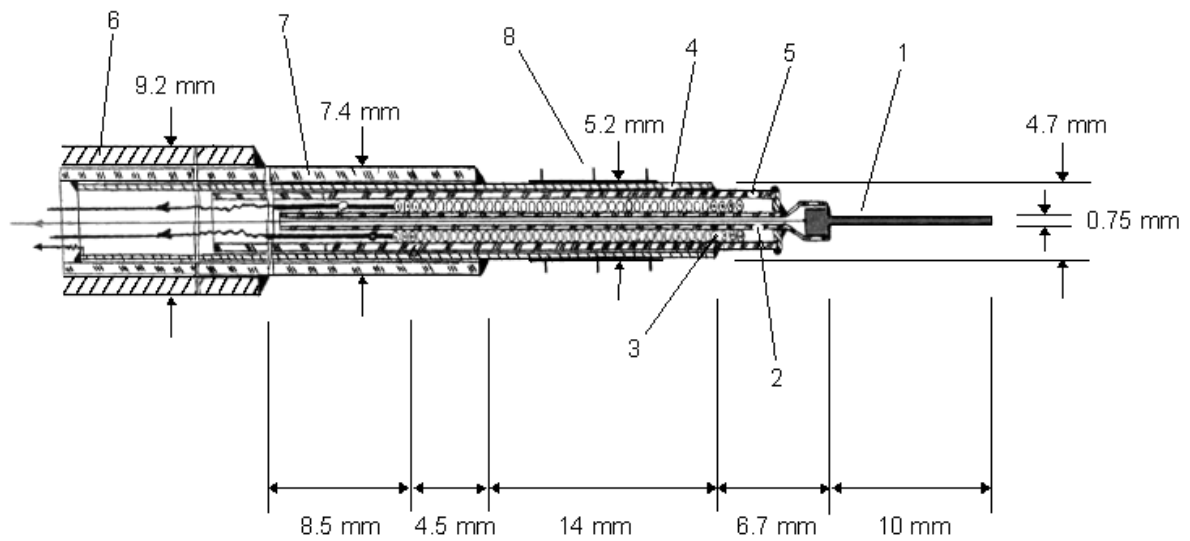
A Cross-Sectional View of the Langmuir Probe.
